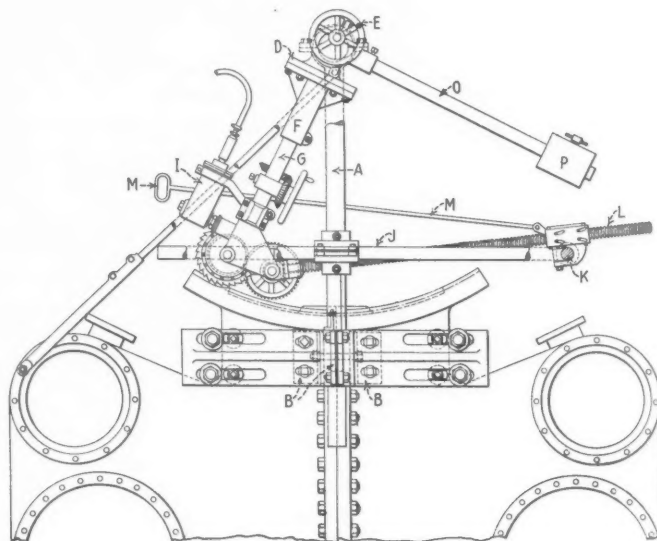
Front view showing the method of mounting the cylinder saddle miller
